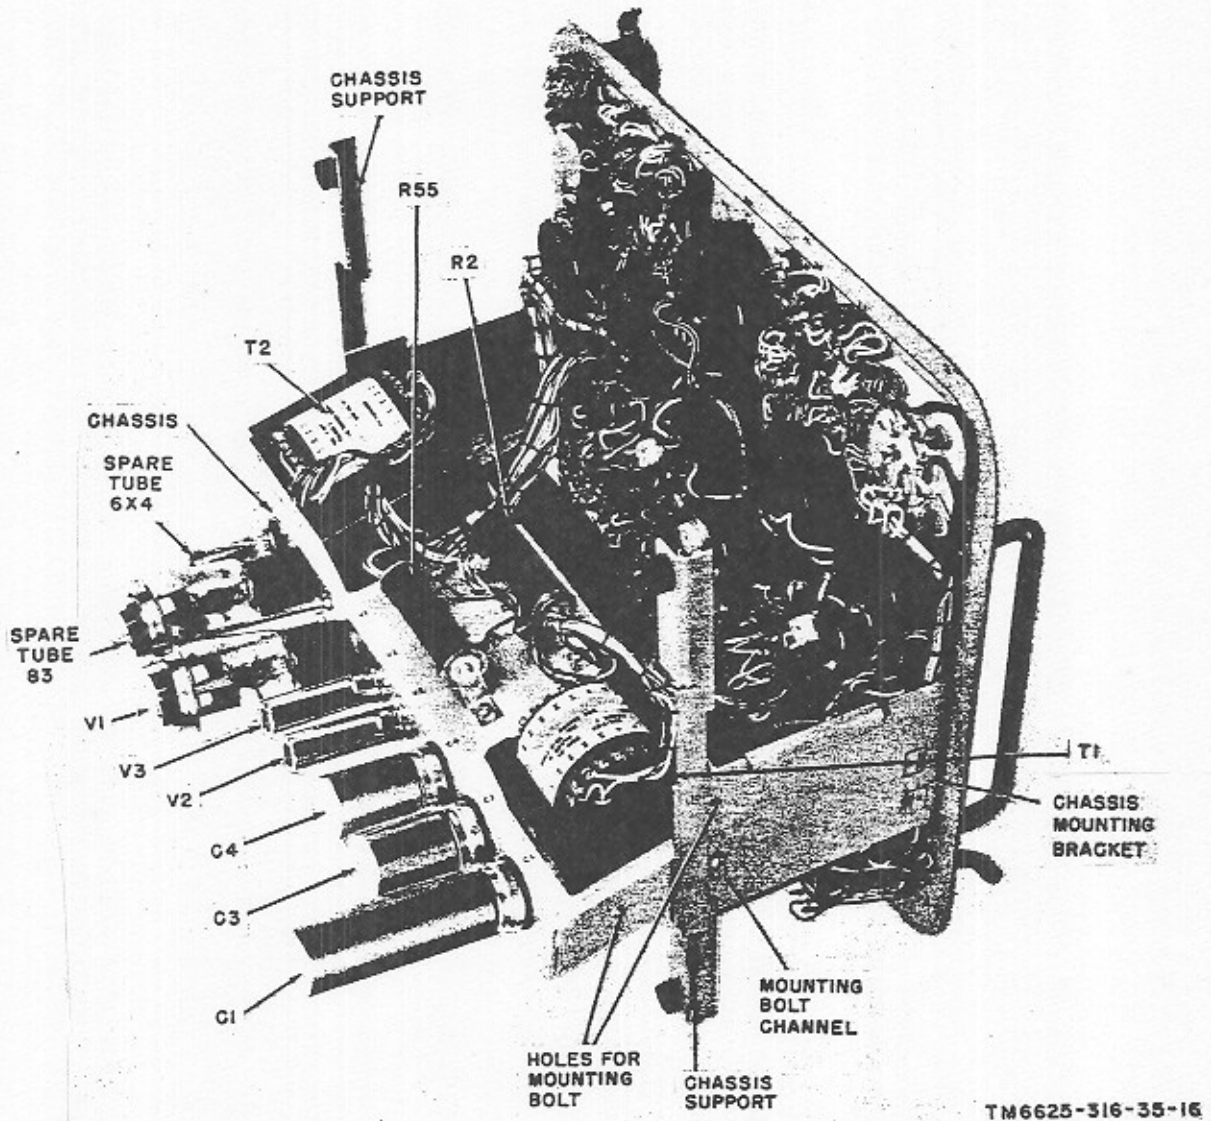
Front of chassis of Test Set, Electron Tube TV-2(\*)/U, location of parts.
